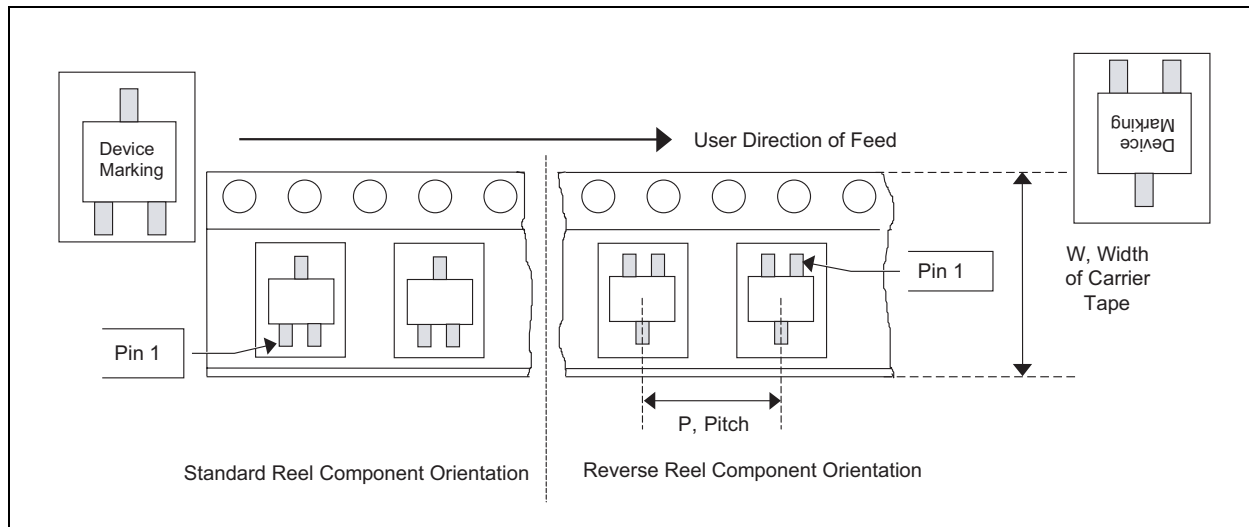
EMBOSSED CARRIER DIMENSIONS (8, 12, 16, AND 24 MM TAPE ONLY)
